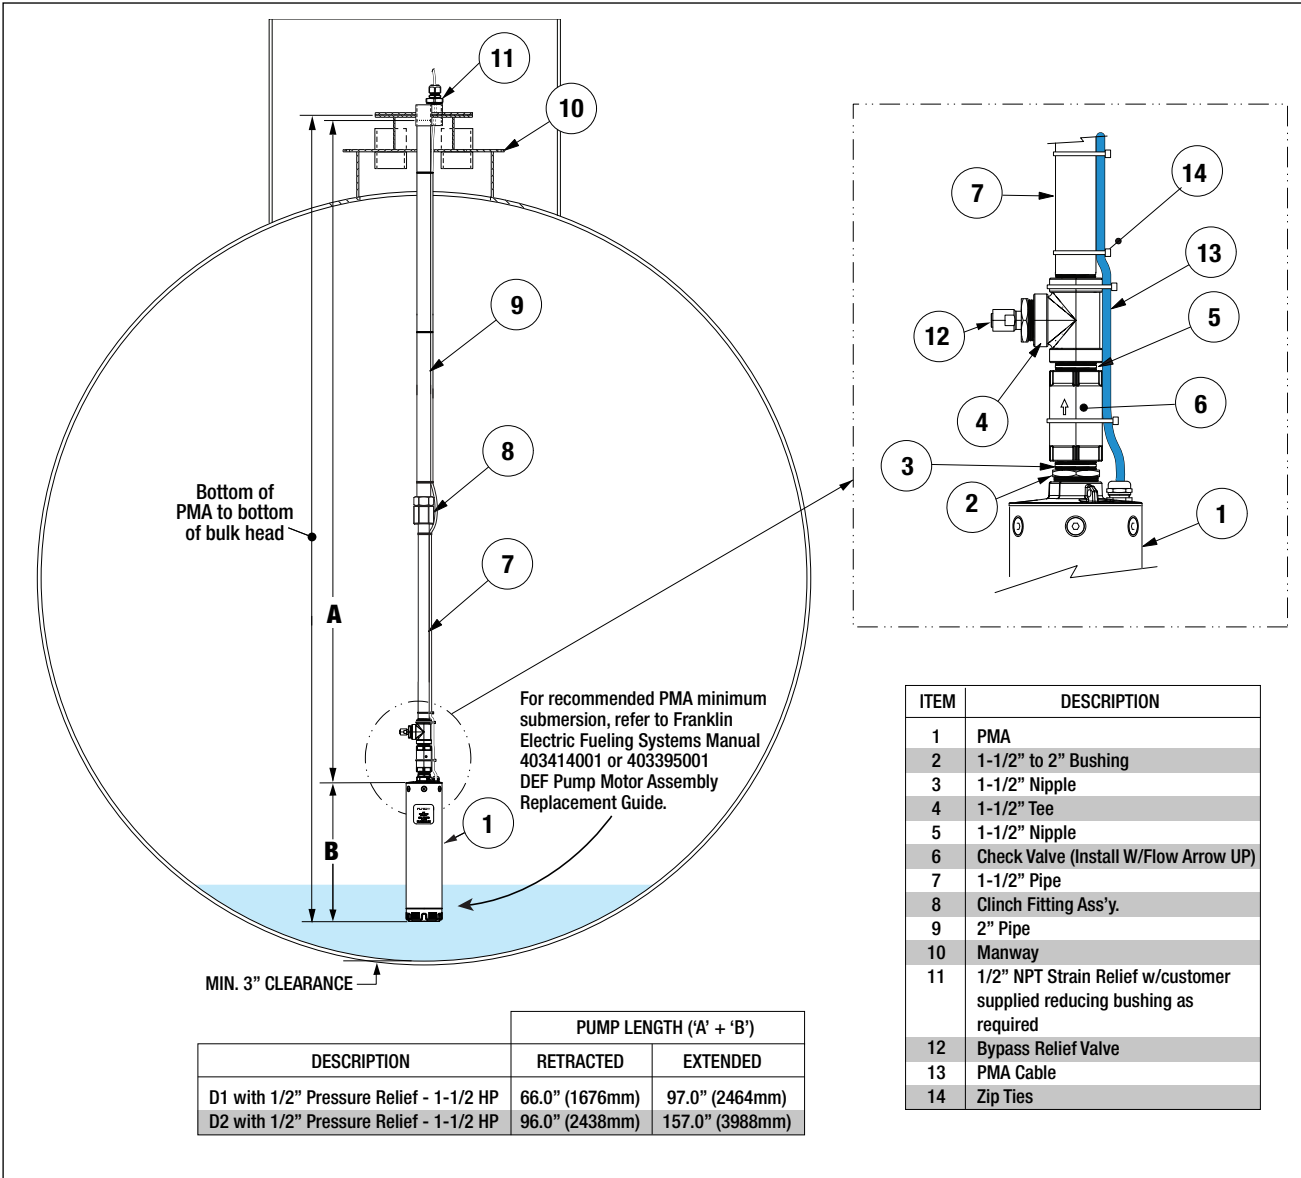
Submersible DEF Pump Dimensions/Tank Installation w/ Fixed Bypass Pressure Relief Assembly
